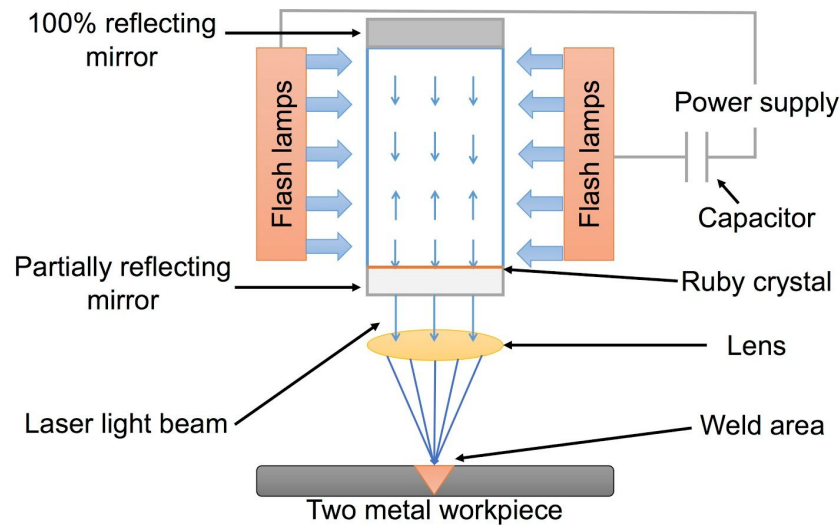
Schematic of laser beam welding on multiple layers of metal.
